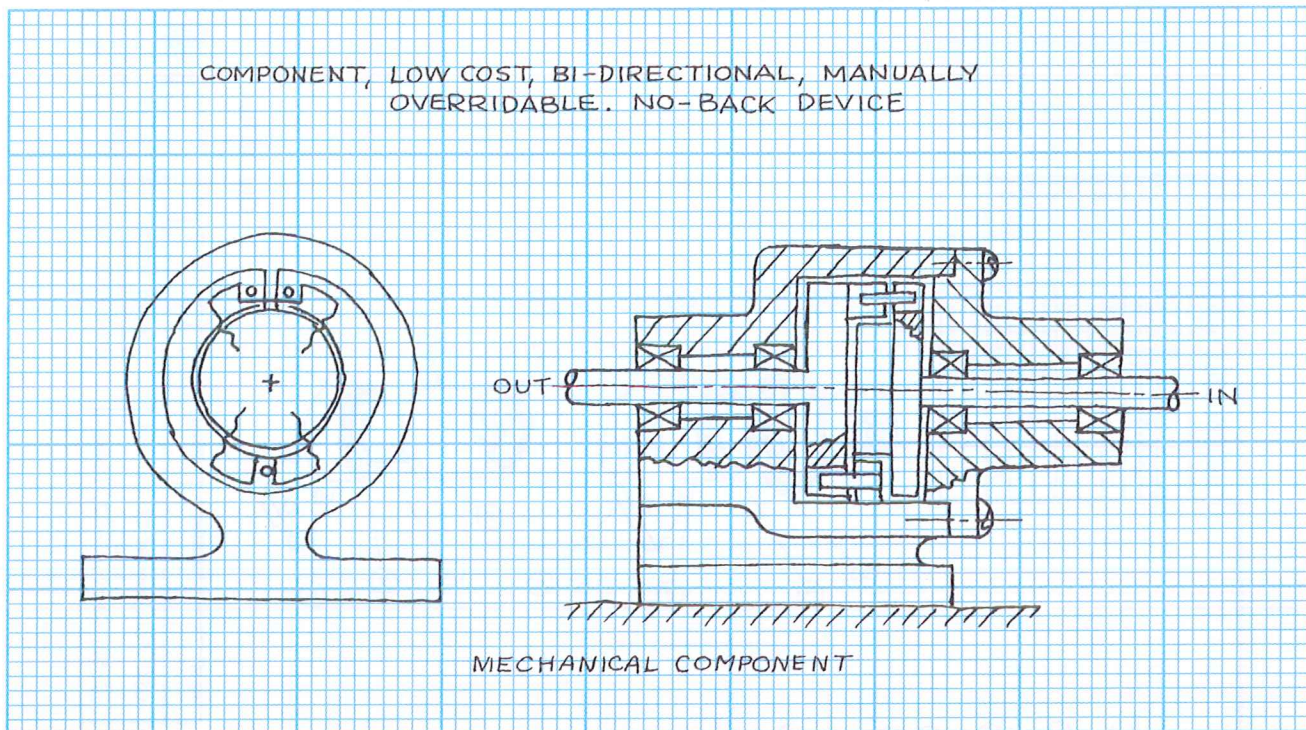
Design engineers use preliminary sketches to get their ideas on paper. (Sperry Flight Systems Div.)
